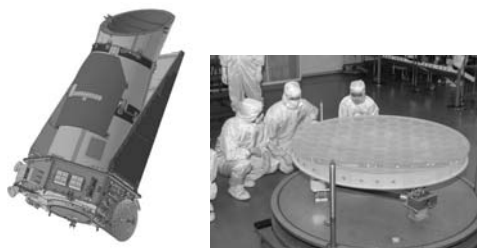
Left: Integrated spacecraft and photometer. Right: Light-weighted primary mirror being inspected at BATC before being sent out for coating.
